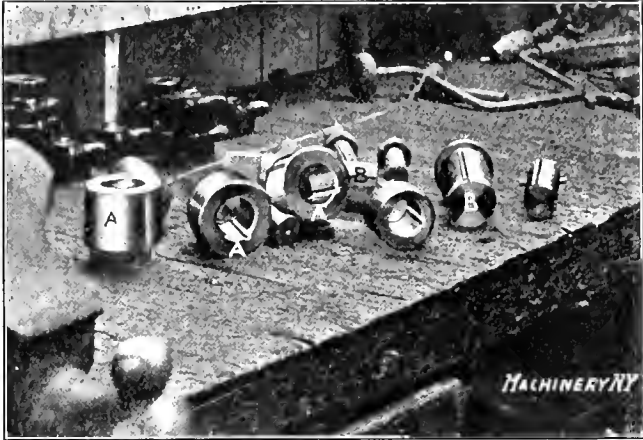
Apron Bushings and Plugs used for Screwing them in.
